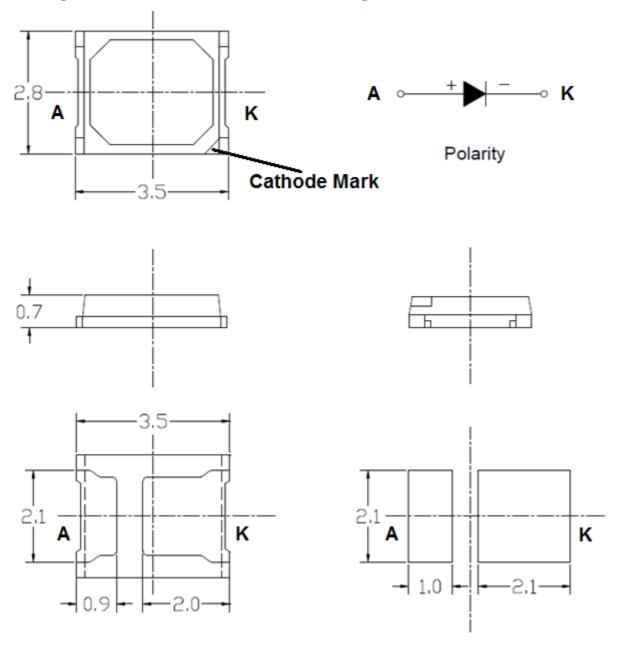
Mechanical Drawing & Soldering Pattern of the 2835 package
